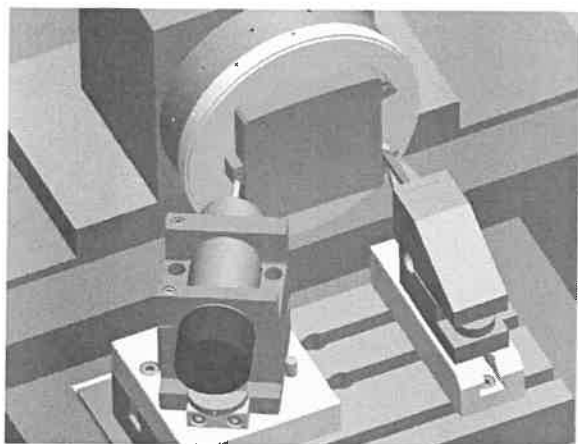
Basic Setup for combined C-Axis-Milling and Turning: Spindle/C-Axis with freeform work piece, Turning tool, additional milling spindle.
